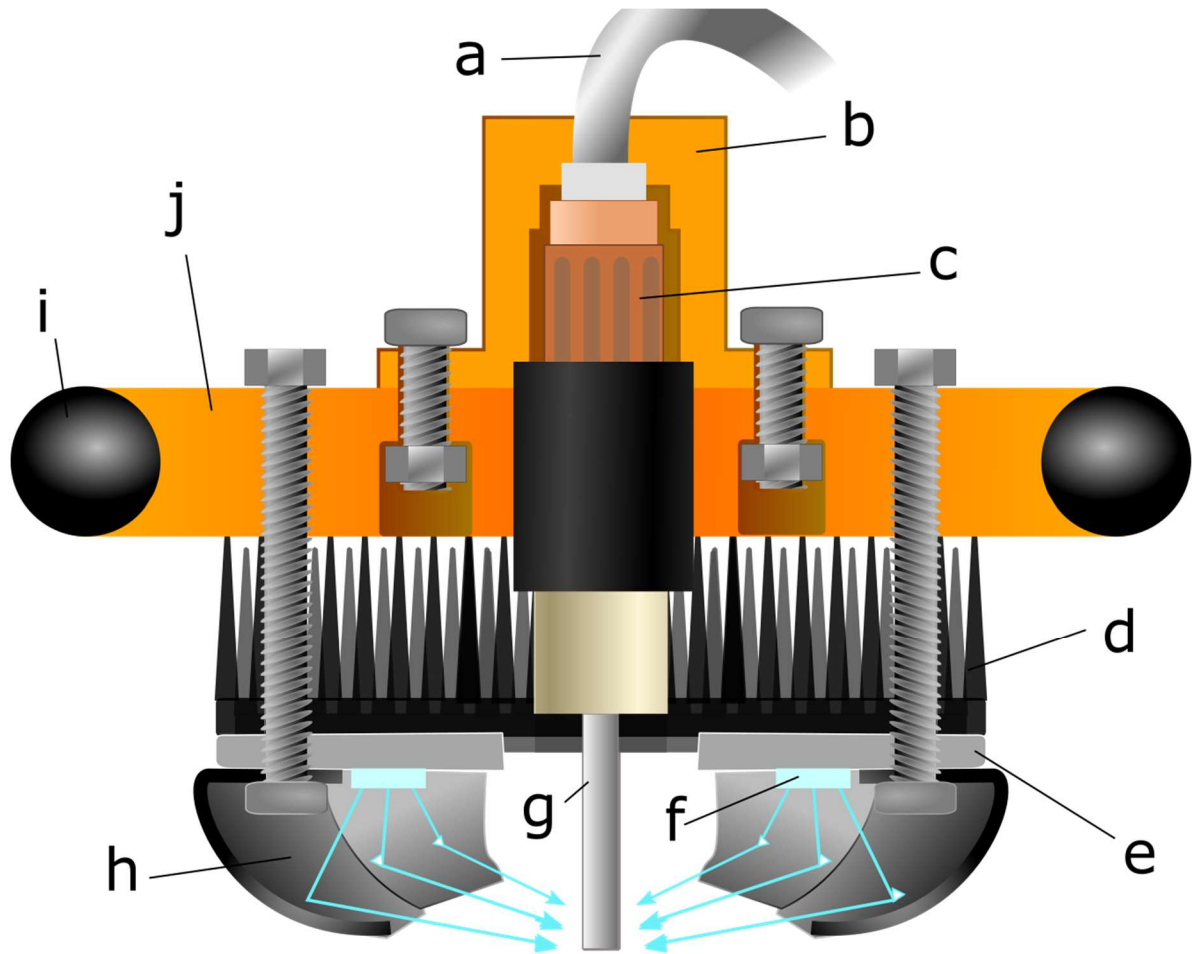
Cutaway drawing showing full print head. Labelled parts are a) tube carrying polymer from syringe, b) nozzle holder as shown in Fig 3.9, c) threaded union to needle holder, d) headsink, e) printed circuit board, f) UV LEDs, g) needle that extrusion comes from, h) focusing element, i) joints on the side which connect to rods that move the head, and j) effector mount which bears it all.
